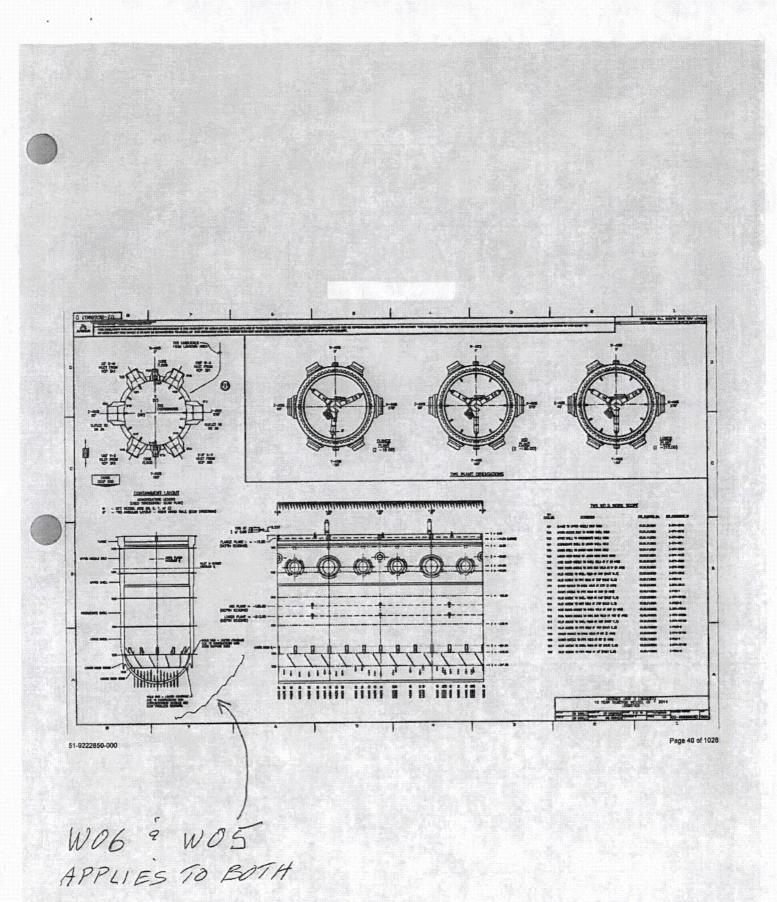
TWS Weld W05 - Lower shell to Lower Head Weld
